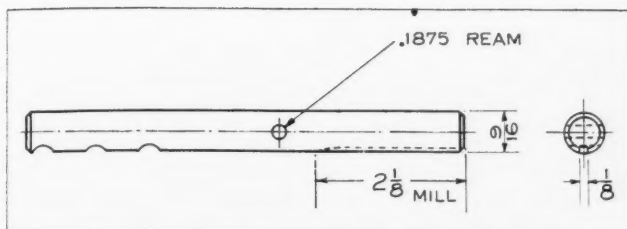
Gear-shifter Shaft Notched and Drilled on Machine in Fig. 11
